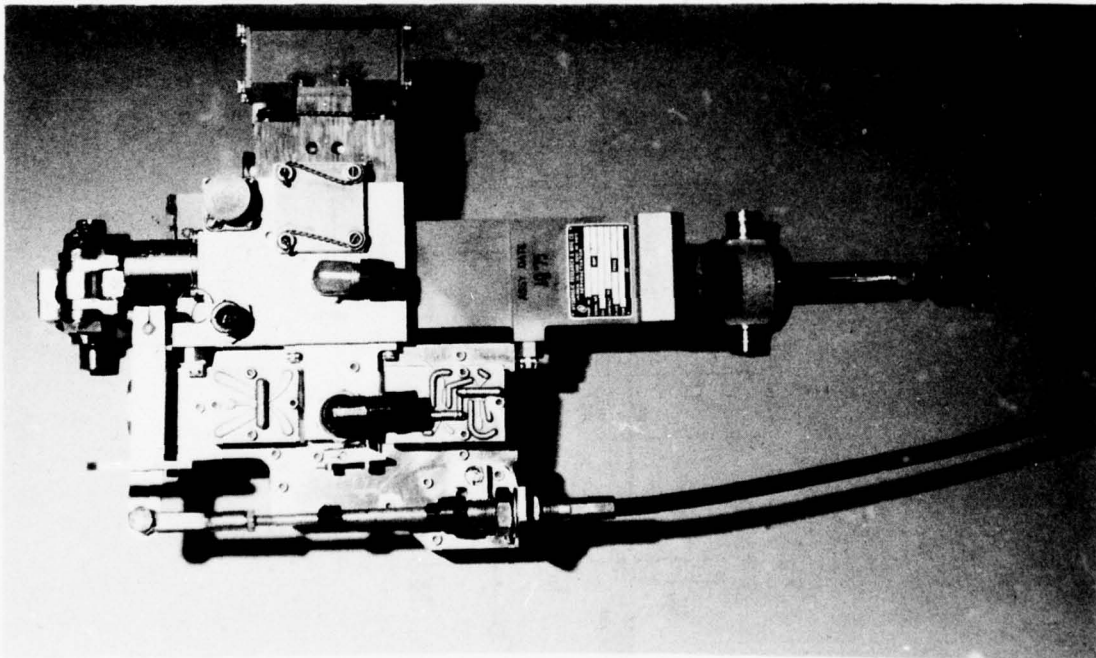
Yaw Axis Controller Servoactuator Assembly - Top View.
